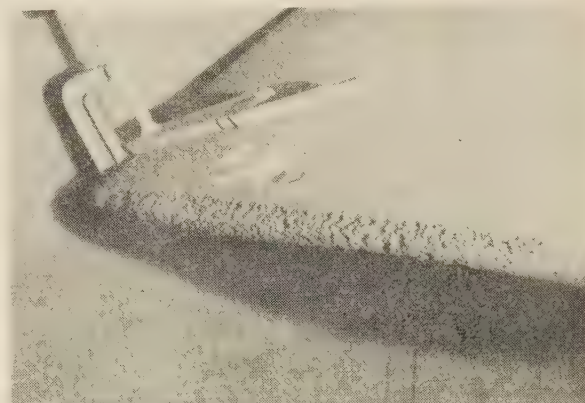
PITTING ON TRAILING EDGE OF BLADE
